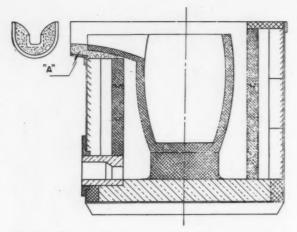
This sketch shows the method of mounting refractory crucibles in tilting furnace in which, essentially, open-flame melting conditions are encountered.
